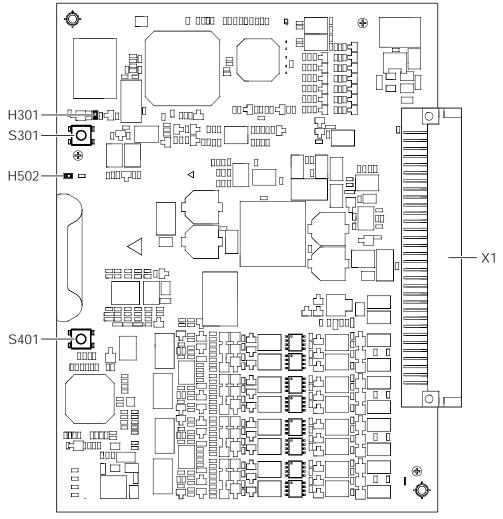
PCB view of the line card (SynoLOOP) FCL7201-Z3
